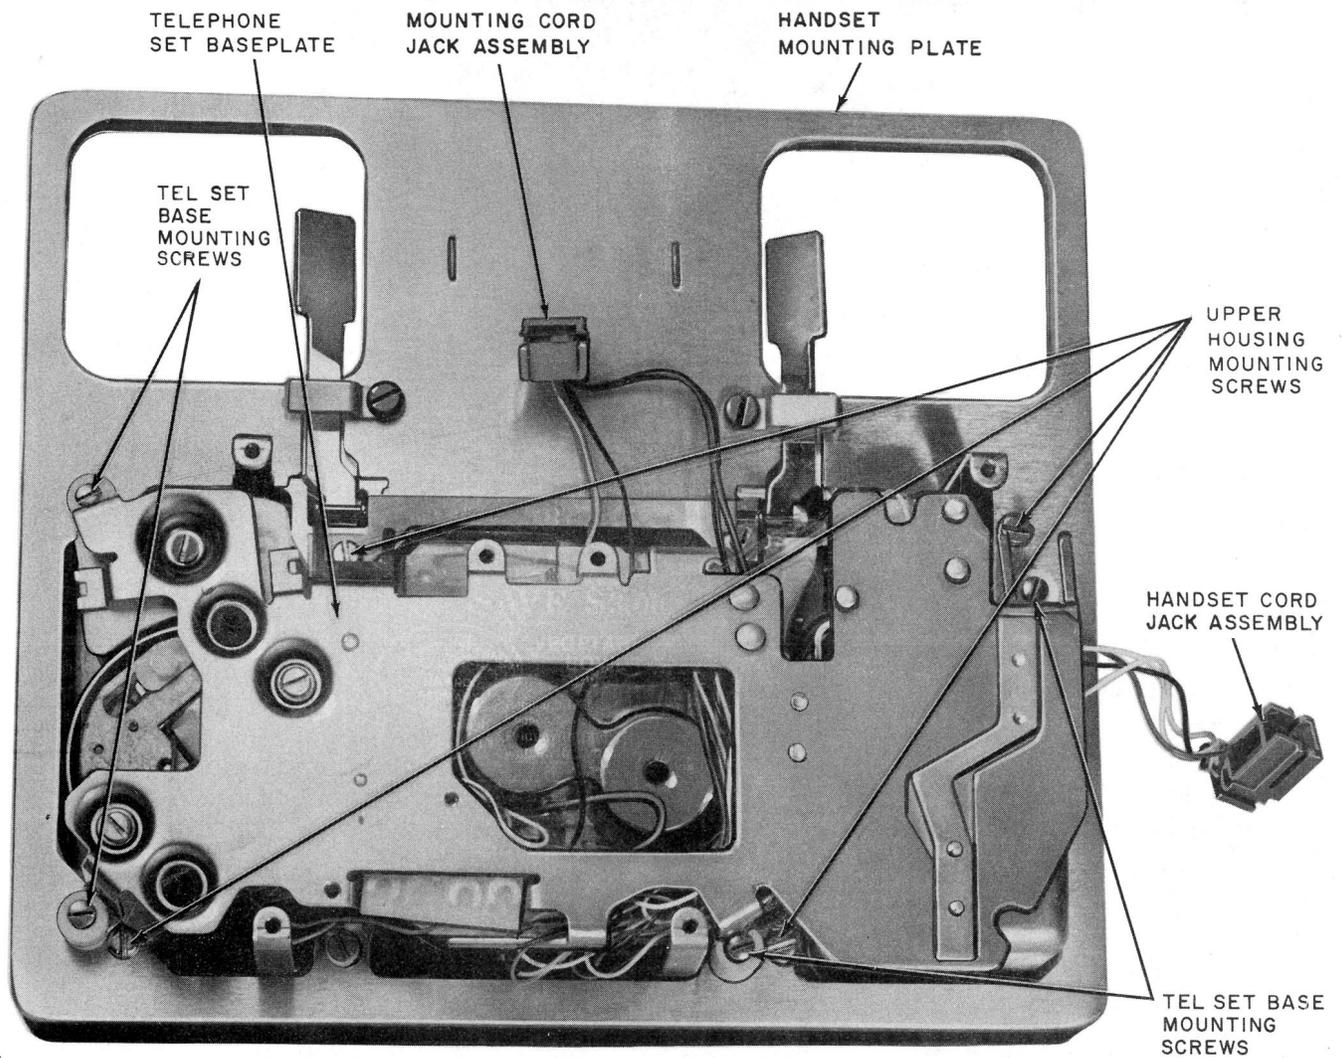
2930A-Type (MD) Telephone Set with Lower Housing Removed
